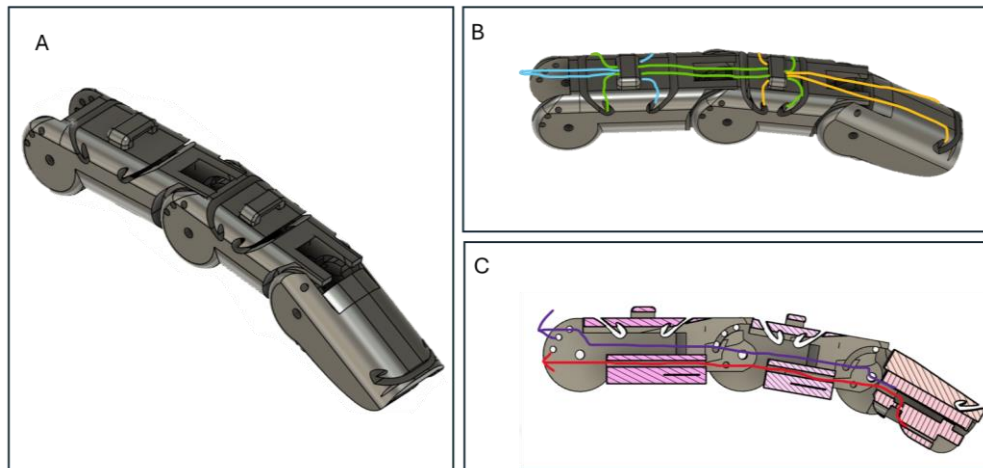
CAD of Model C (A) three plane view (B) placement of the rubber bands (C) side view with cut in purple wire passage and in red string position.
